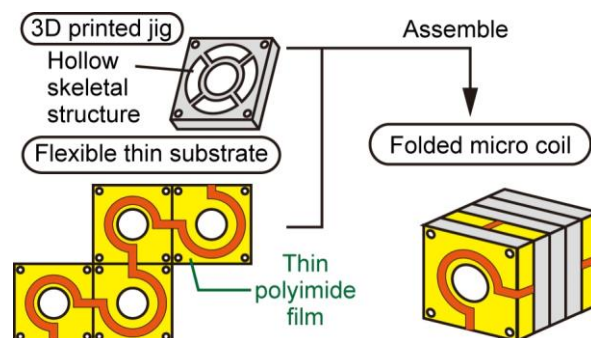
Concept of folded multilayer micro coil which assemble flexible substrate and 3D printed jigs.
